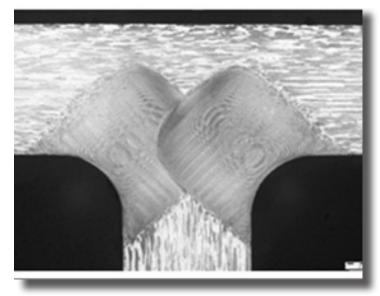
Metallographic section through a radiused corner fillet weld made by two FSW passes in 8mm thick AA6082.
